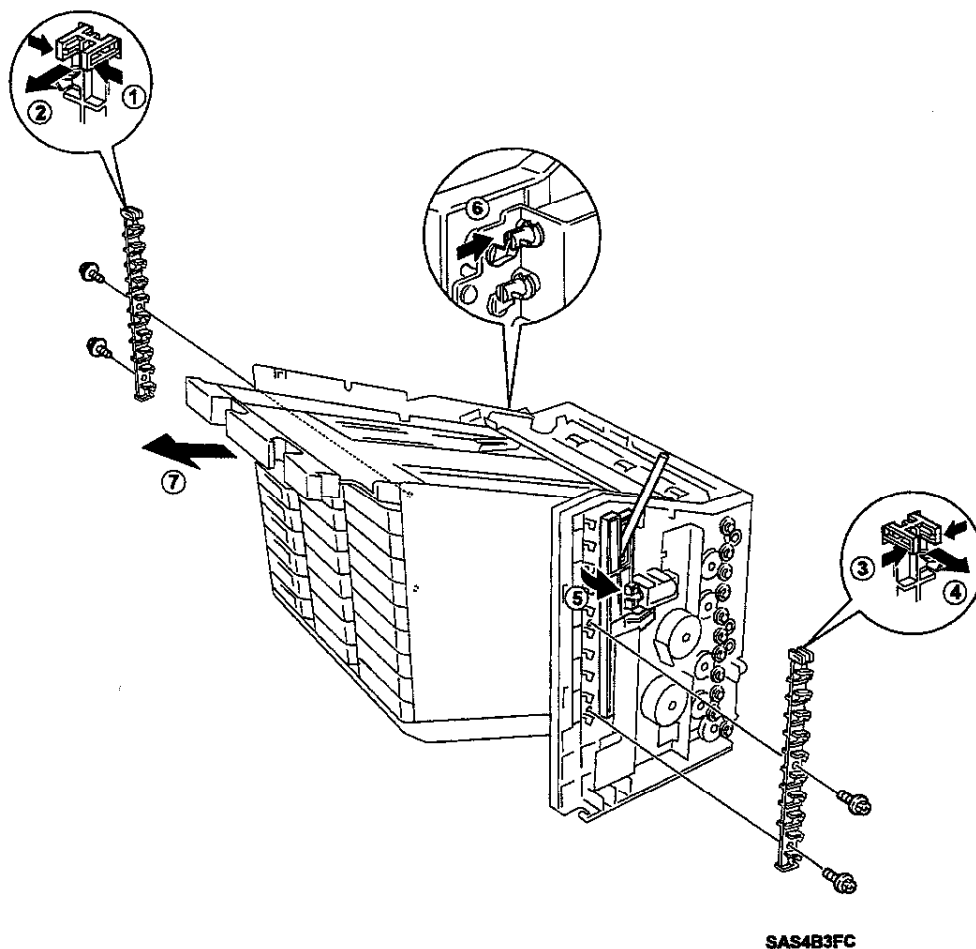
Removing the Mailbox Tray Assembly
